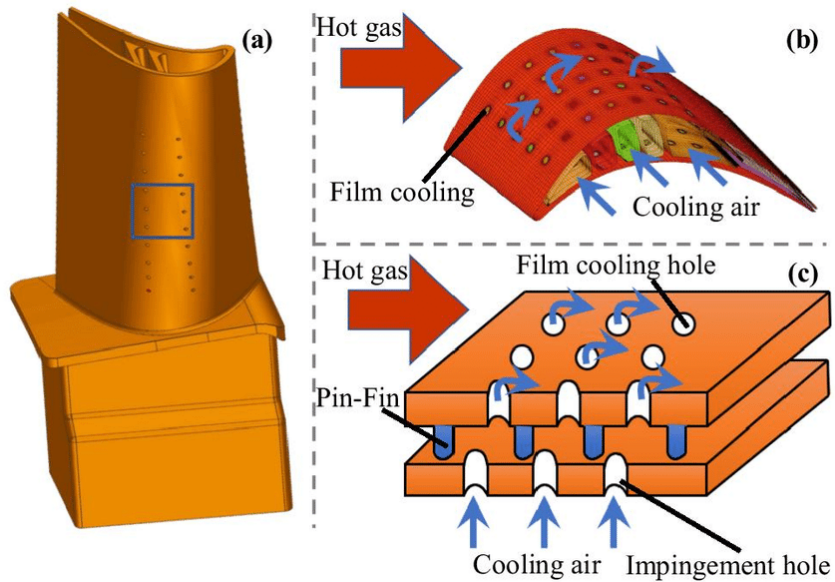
Film Cooling Technique on Blade Surfaces[36].
